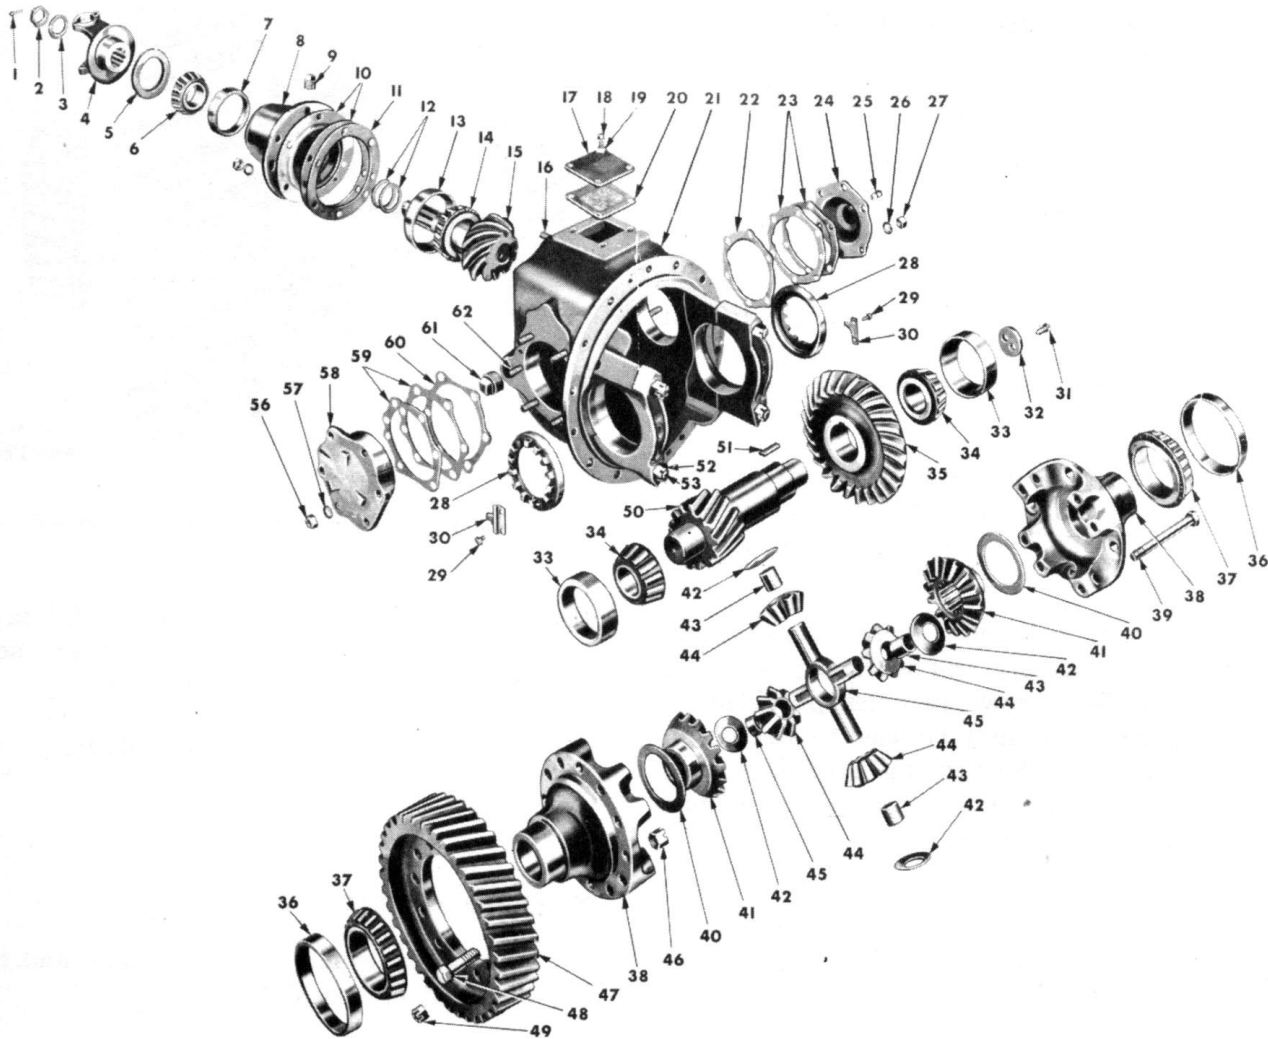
Rear Axle, Double-Reduction, Single-Speed
